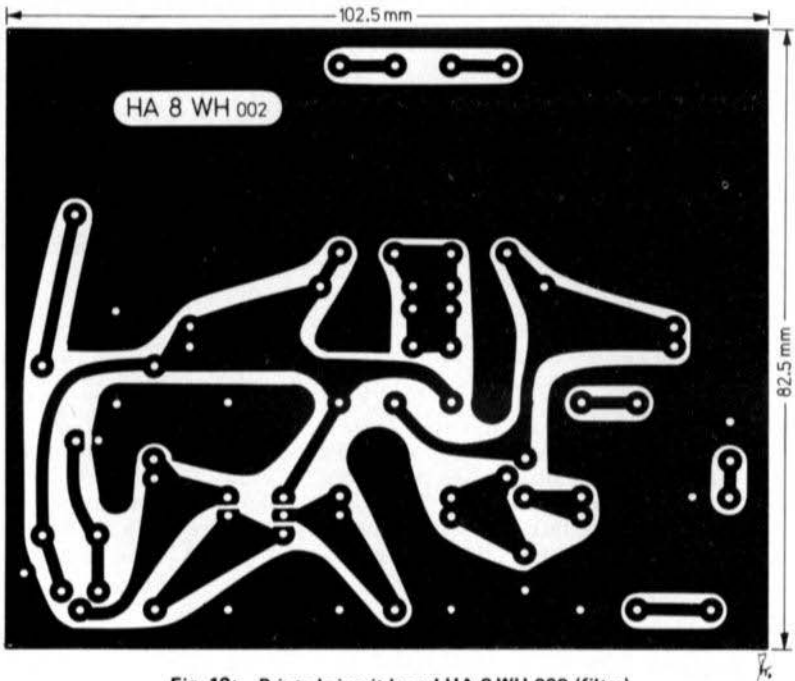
Printed circuit board HA 8 WH 002 (filter)
